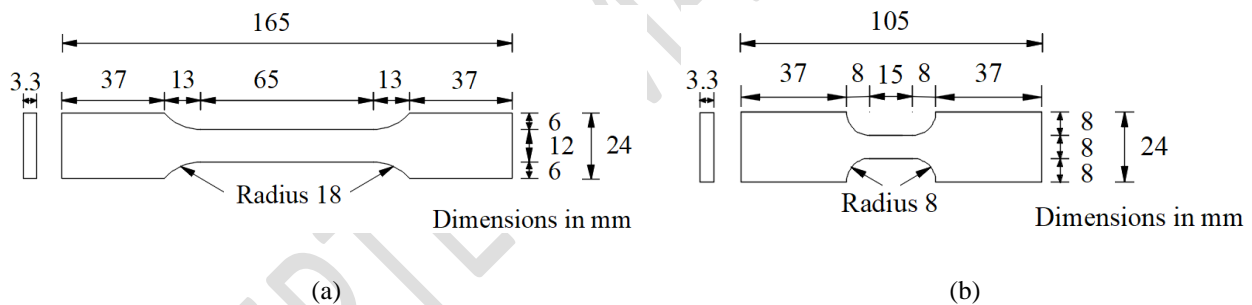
Geometry of coupon specimens; (a) monotonic tensile tests and (b) cyclic tests.
